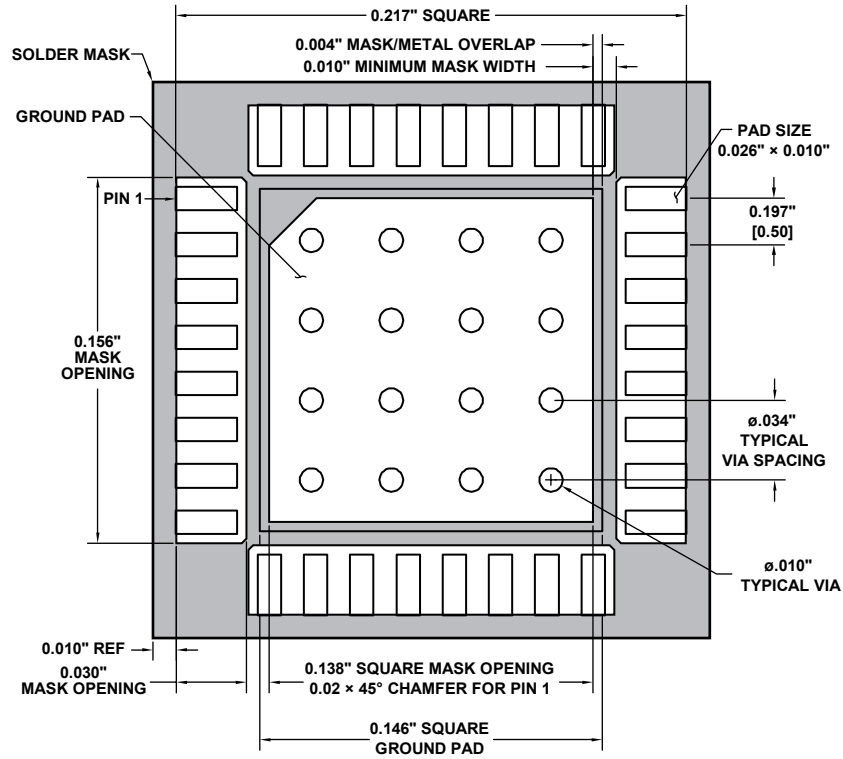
PCB Land Pattern Footprint of the EVAL-ADMV1011
